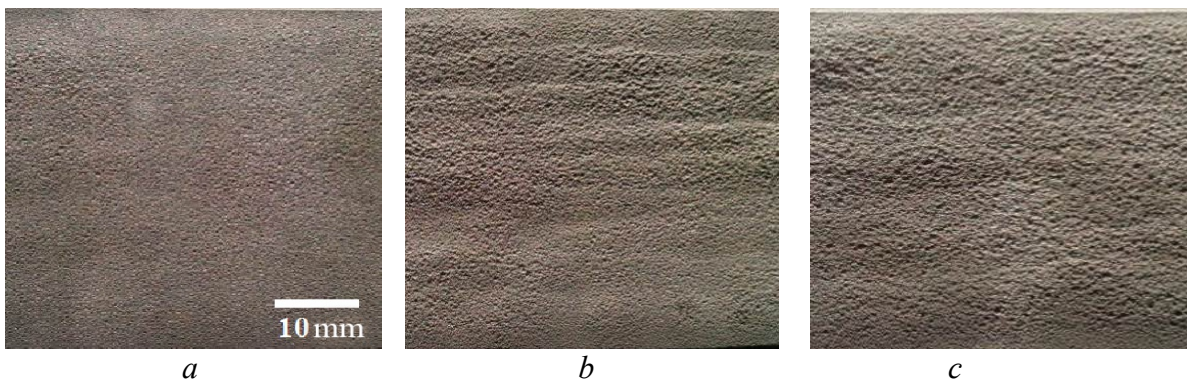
Coating surfaces based on Al-B₄C with the initial powder mixture
